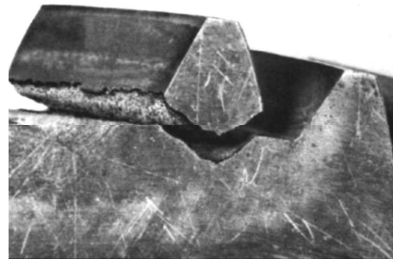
Breaking of a tooth of a gear due to fatigue induced by the bending stresses caused by the transmission torque [4]
